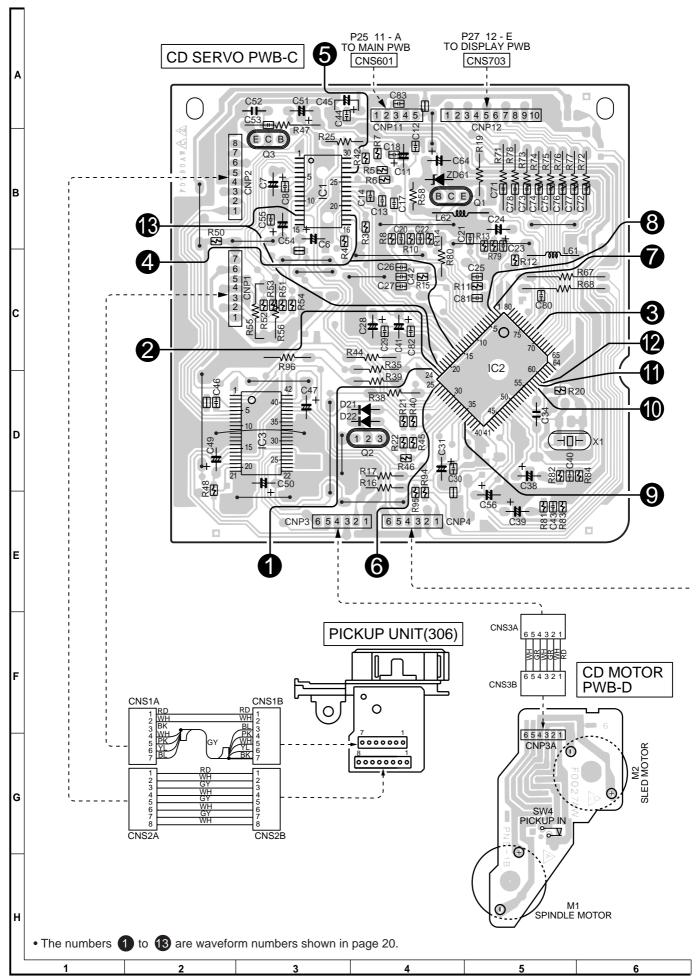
WIRING SIDE OF P.W.BOARD (7/8)
